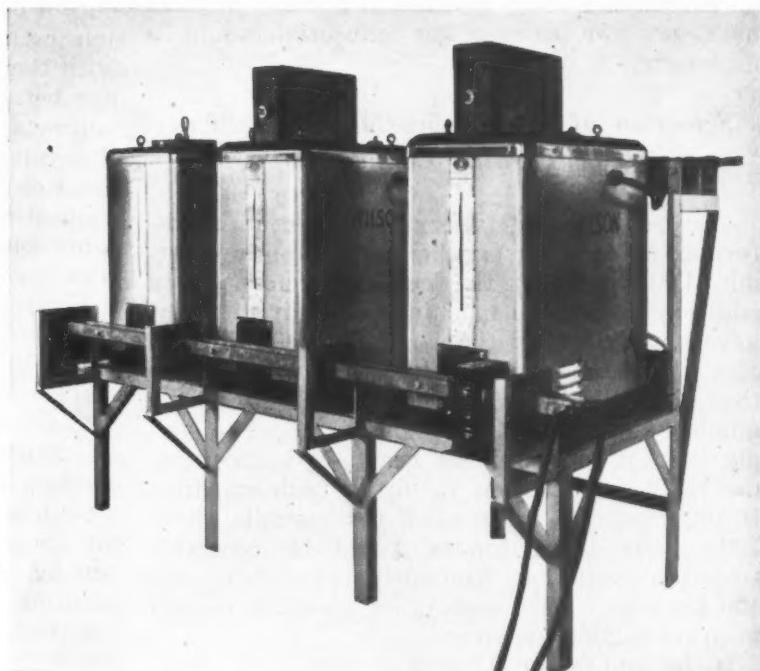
Three 500-ampere Alternating-current Transformer Welders Connected in Parallel for Automatic Welding, with Switching to Permit Use of Each Unit Separately for Manual Welding. Busses are Not Exposed in the Final Installation
